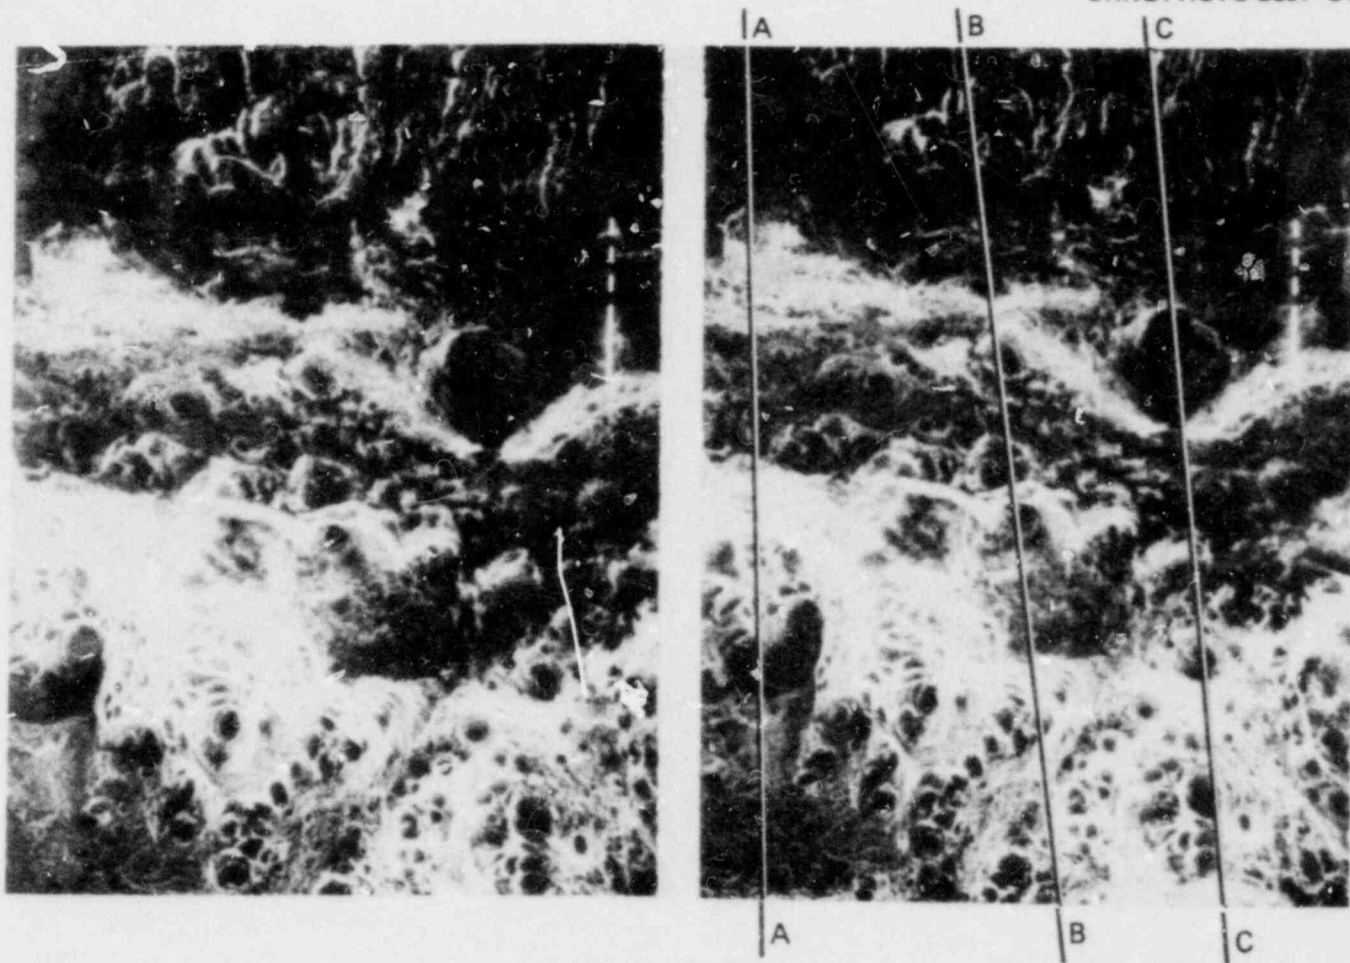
A pair of stereophotographs of upper fracture surface U.
